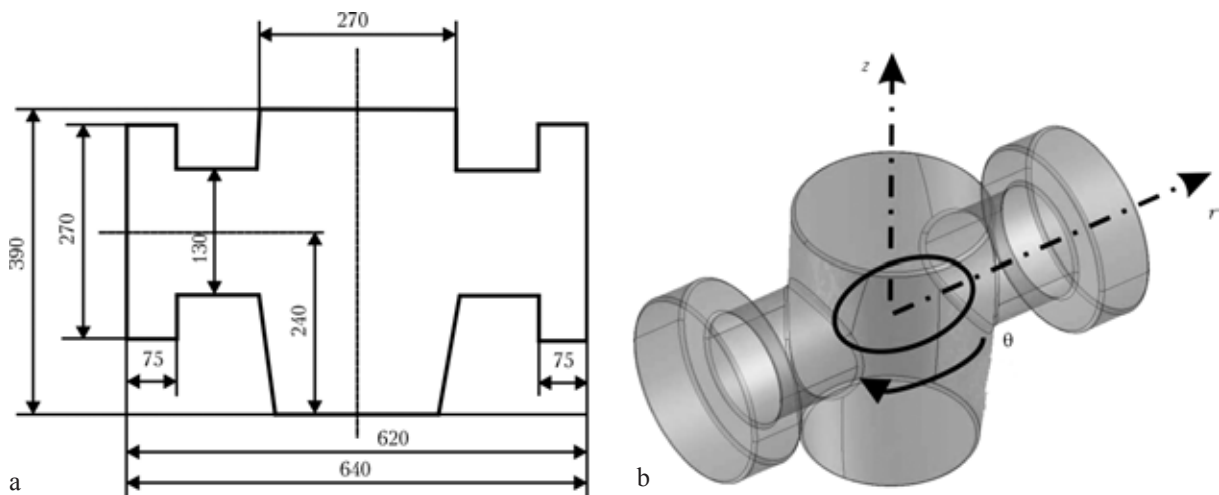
The blank for the body of a flange stop valves with the efficient passage section of 80 mm: a) sketch; b) isometry.
